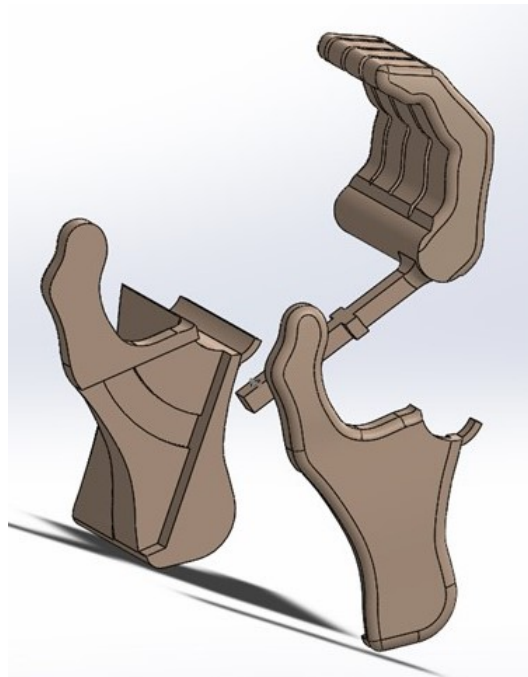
Solidwork assembly explosion of the three parts the hand has been printed in
